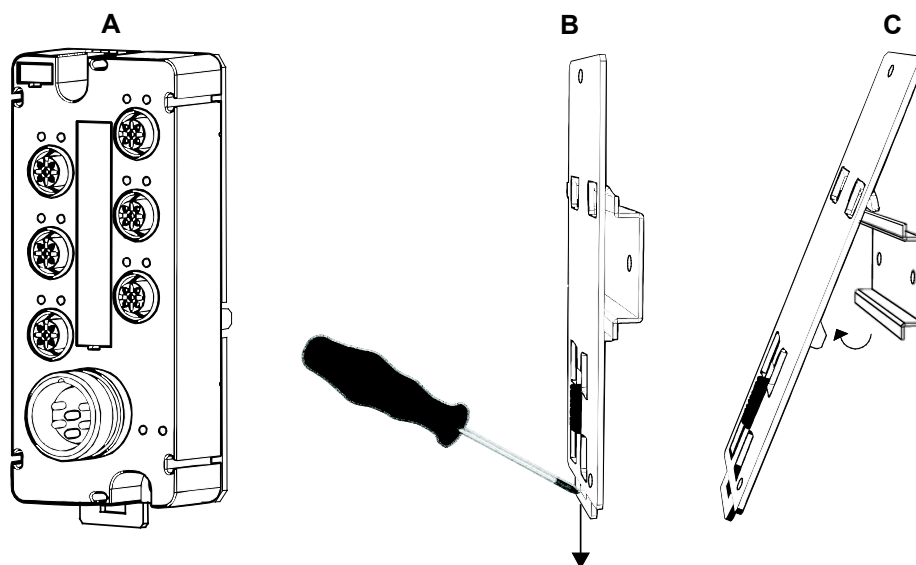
Removing the module (with the carrier rail adapter) from the carrier rail
